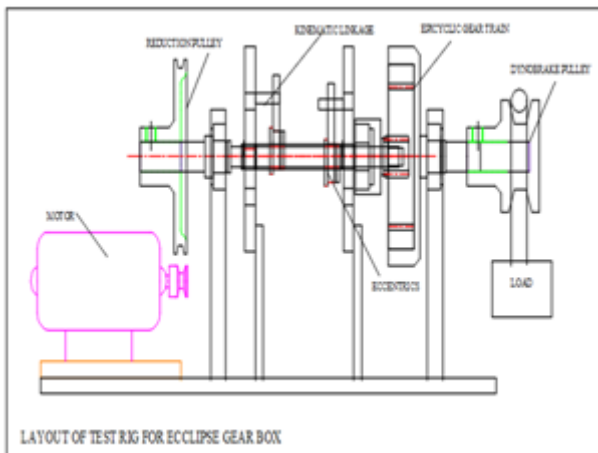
Layout of Test Rig for Eclipse Gear Box
